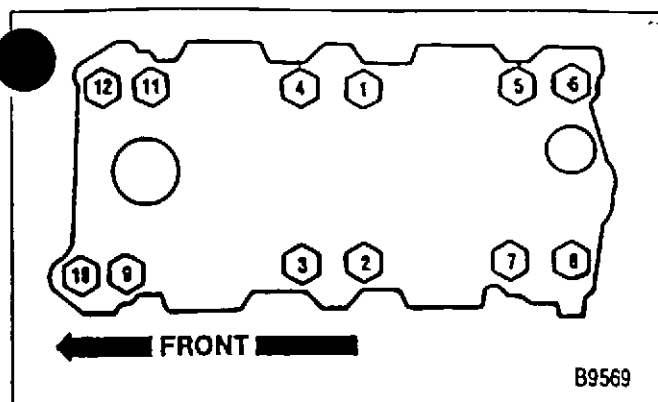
Intake Manifold Bolt Tightening Sequence (5.0L and 5.7L Engines)
